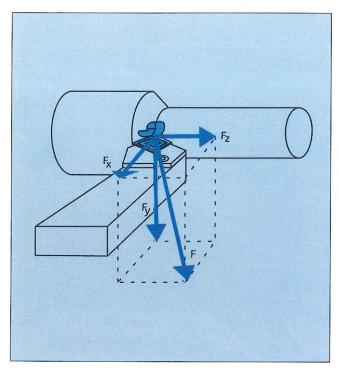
Forces applied to the machine tool in turning: F = total machining force, Fy = principal machining force, Fz = feed force and Fx = radial force.
